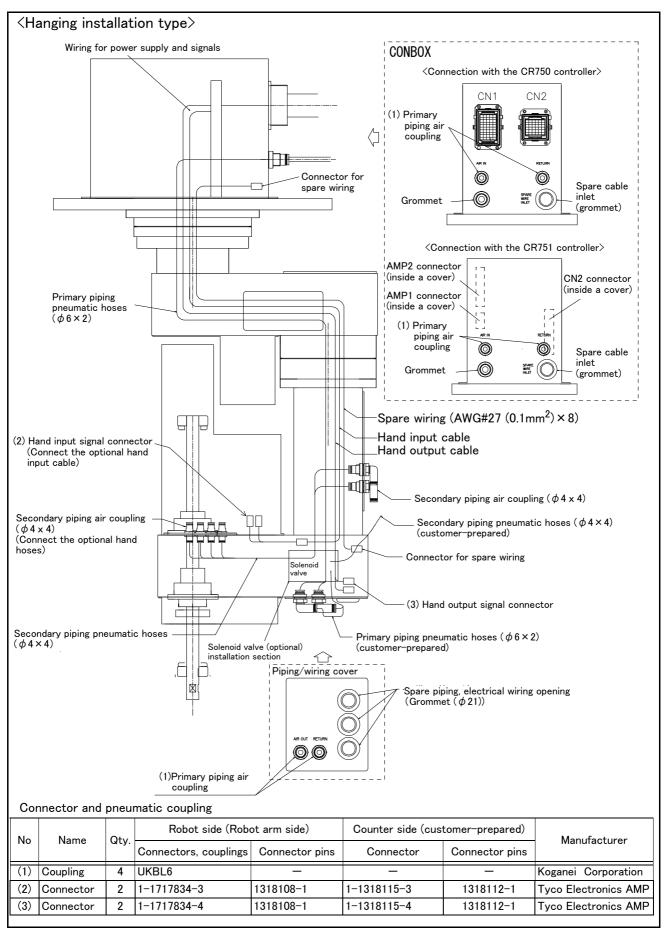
Wiring and piping for hand (Hanging installation type)
